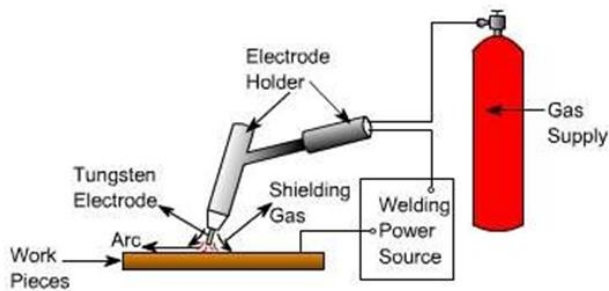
TIG WELDING SYSTEM (Reference 1)
